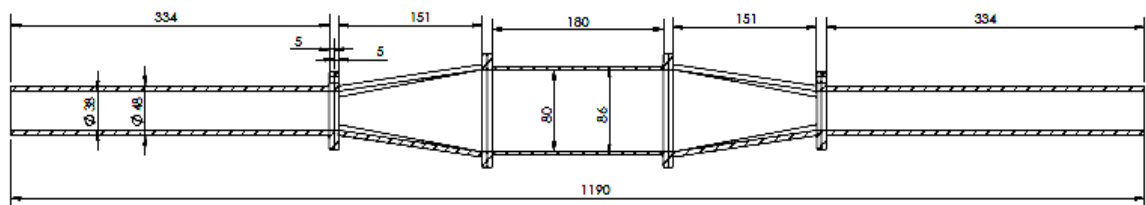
Schematic layout of exhaust heat exchanger (test section 80 × 80 × 180 mm) (C-type).
